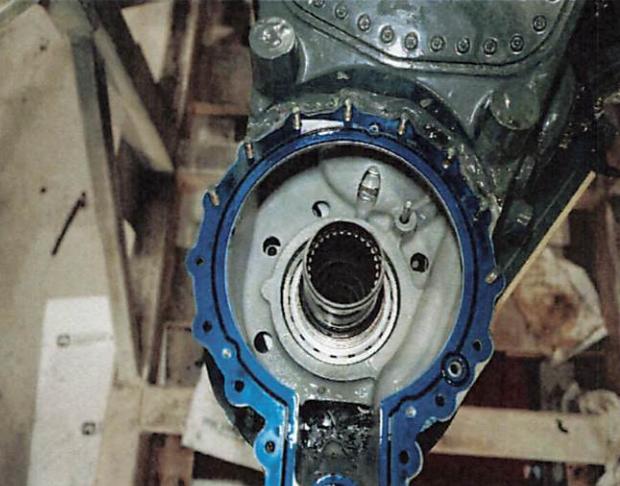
Photo of -113 Bull Gear Damage (Tab J-48)
